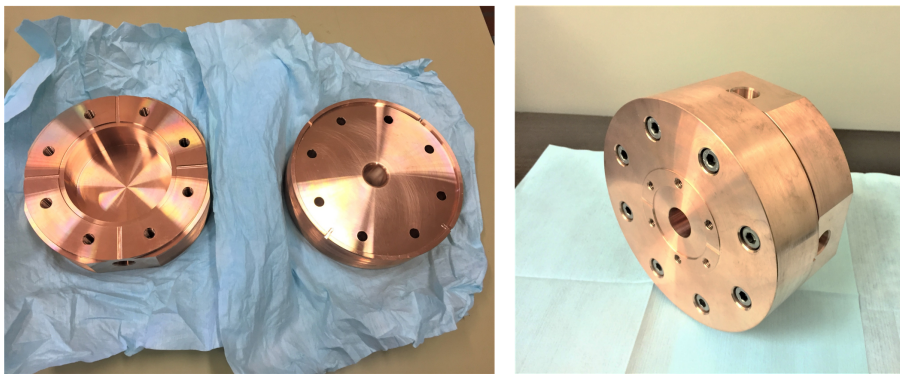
Machined half cell components for the vacuum test before (left) and (after) clamping.
